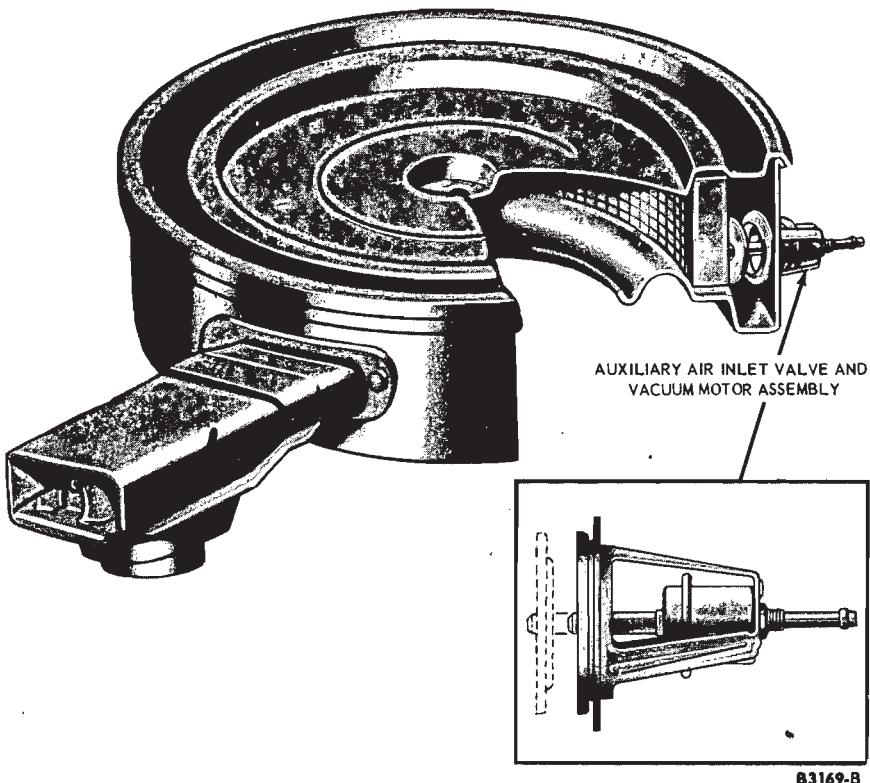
Air Cleaner With Auxiliary Air Inlet Valve and Vacuum Motor
